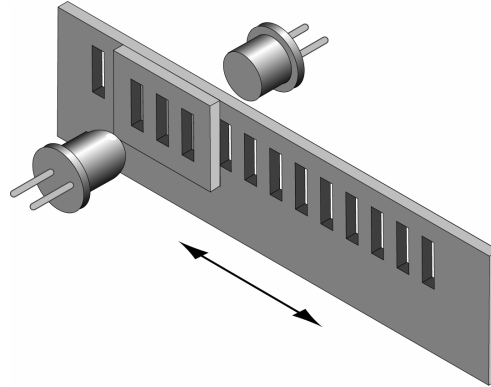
Single-Channel Optical Encoder Scale and Read Head Assembly.
